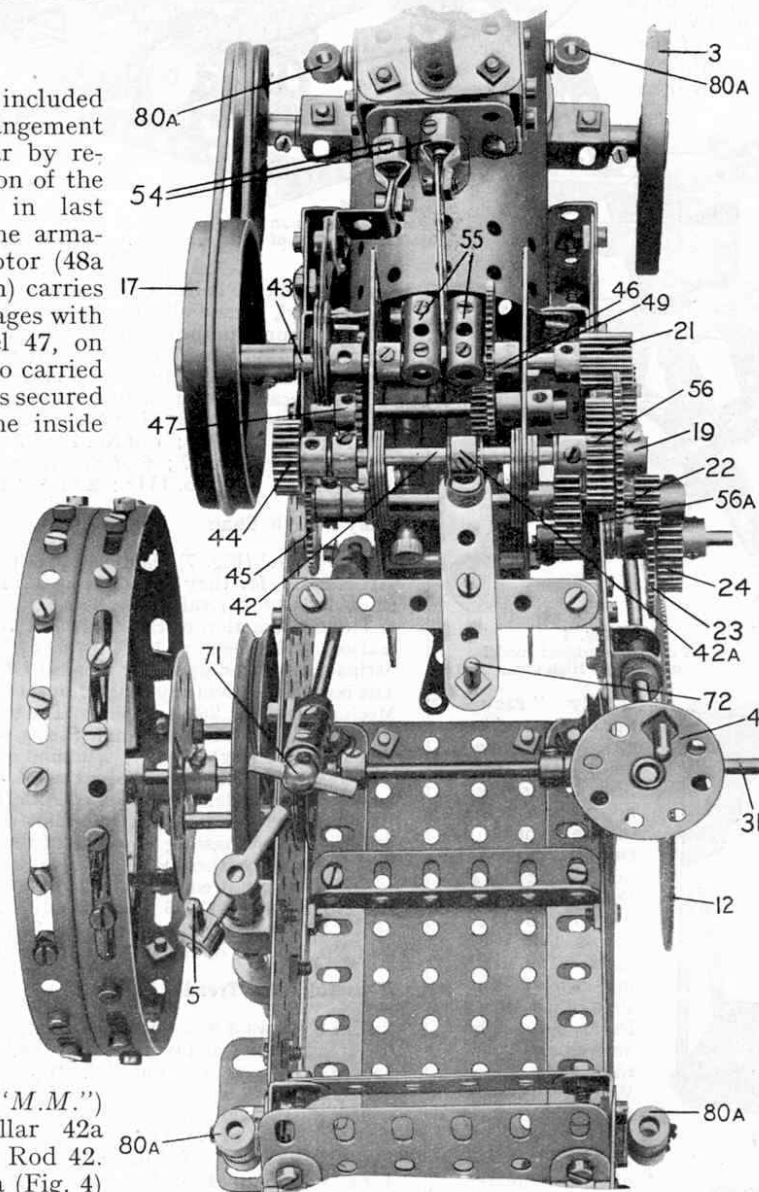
Plan view, showing Crankshaft and Gearing, etc.
